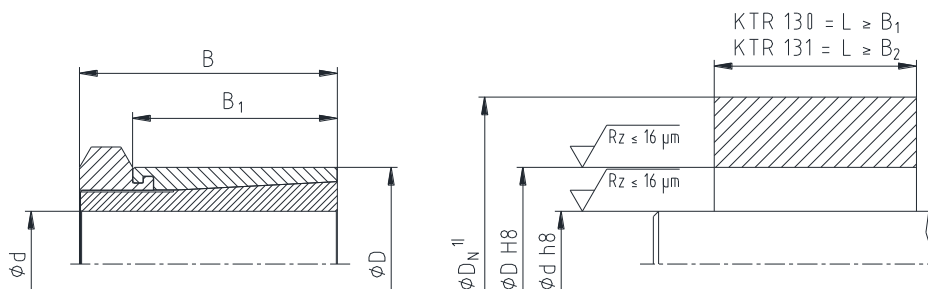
Tolerances and surfaces (example: CLAMPEX® KTR 225)
